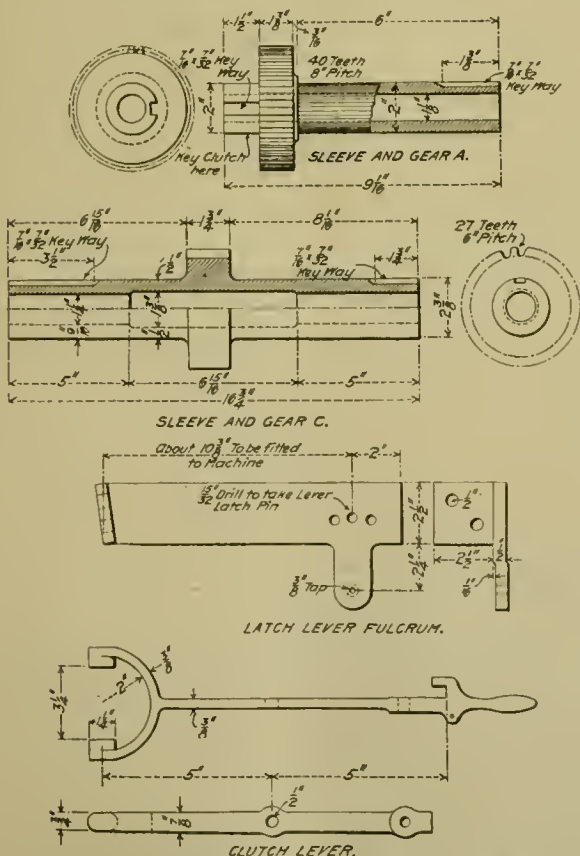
DETAILS OF THE NEW PARTS REQUIRED FOR THE NEW MOTOR DRIVE, TO FURNISH TWO CHANGES OF SPEED BY GEARING.
